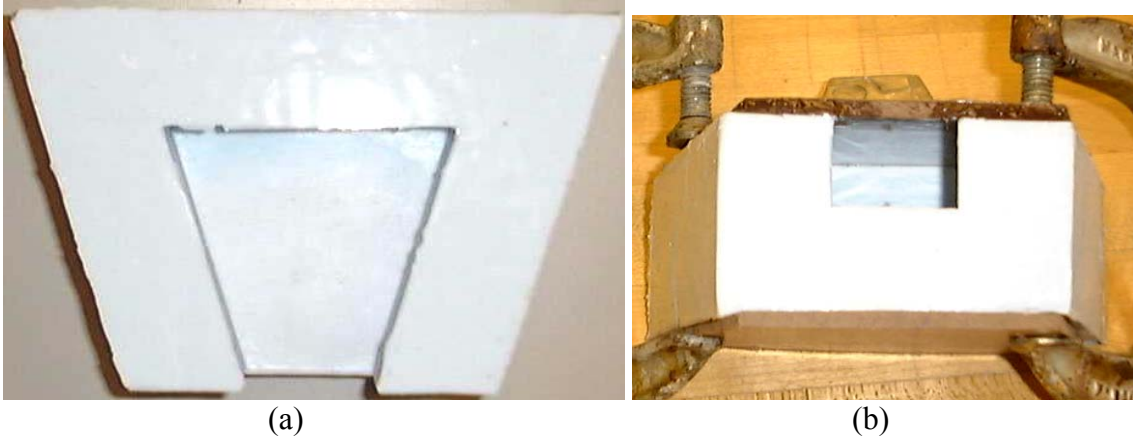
(a) Silicon Rubber Mold for End Tab; (b) Mold in Upright Position with Front Covered.
